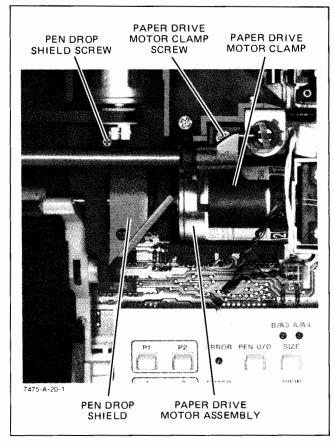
Paper Drive Motor Clamp and Pen Drop Shield
